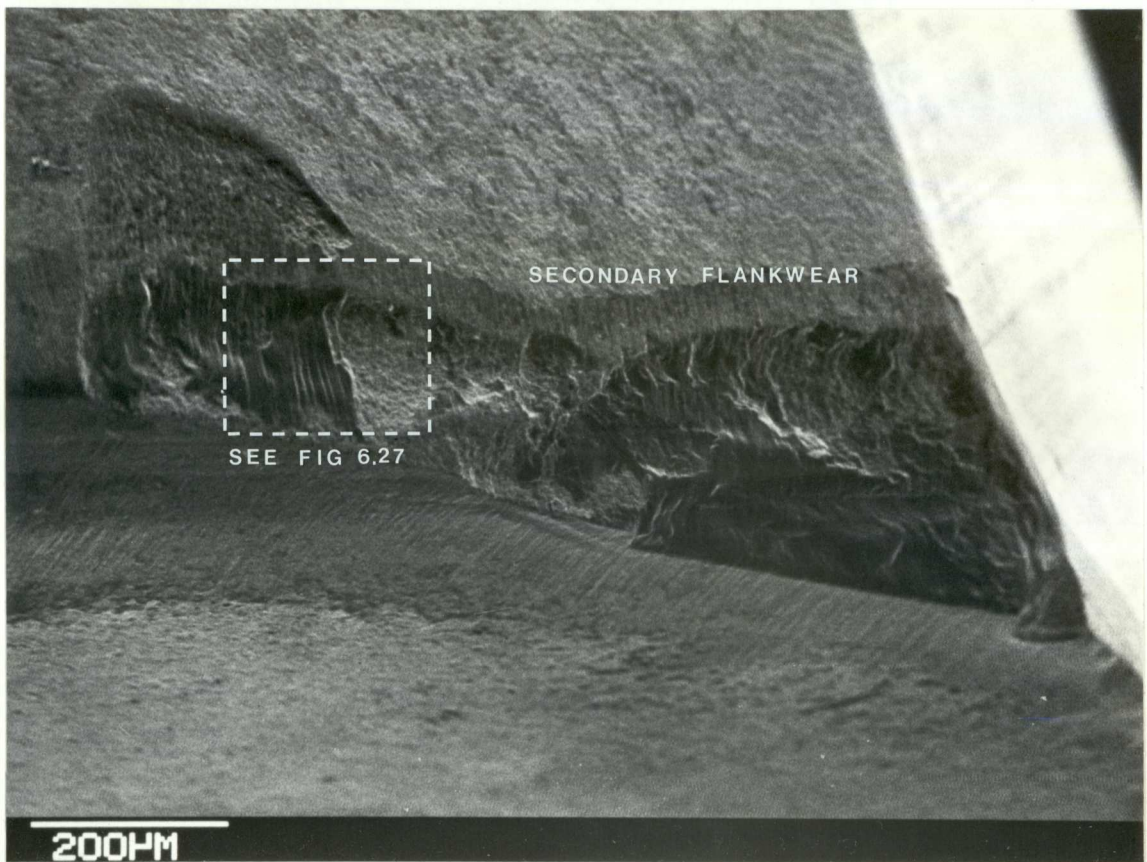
BROKEN CUTTING EDGE SHOWING
